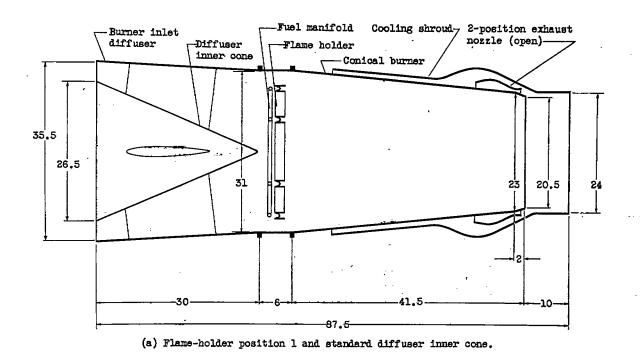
Schematic drawing of engine and tail-pipe burner in altitude chamber.
